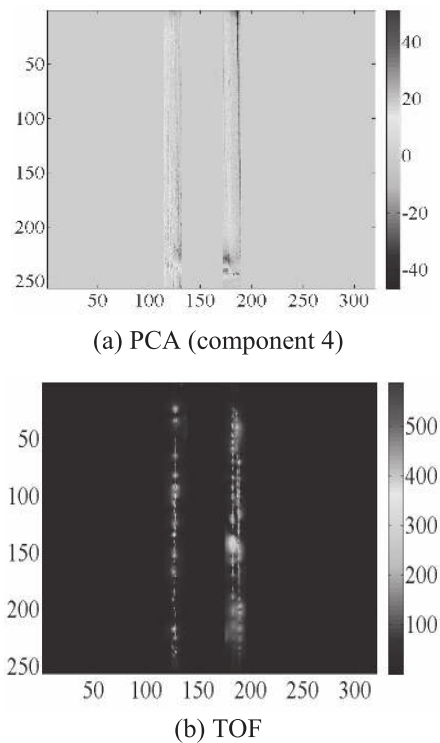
Two-dimensional pseudo colour images at stage 5: (a) using PCA method and (b) using TOF method. (Note: the fatigue non-contact tooth flank is on the left, and fatigue contact tooth flank is on the right).
